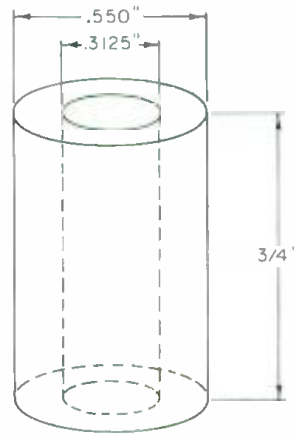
Capstan sleeves to be fabricated, one for each machine.
